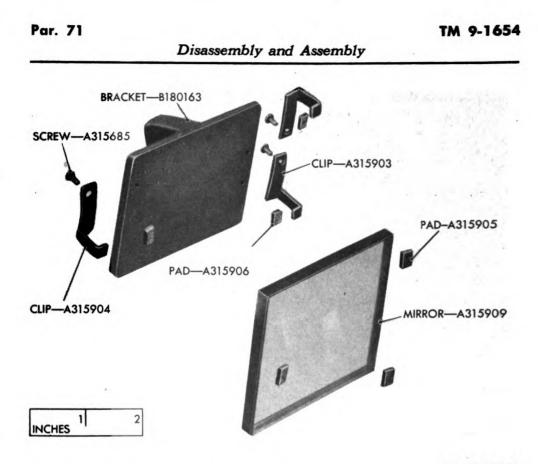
Upper and Side Mirror Bracket Assemblies C82370 – Exploded View
